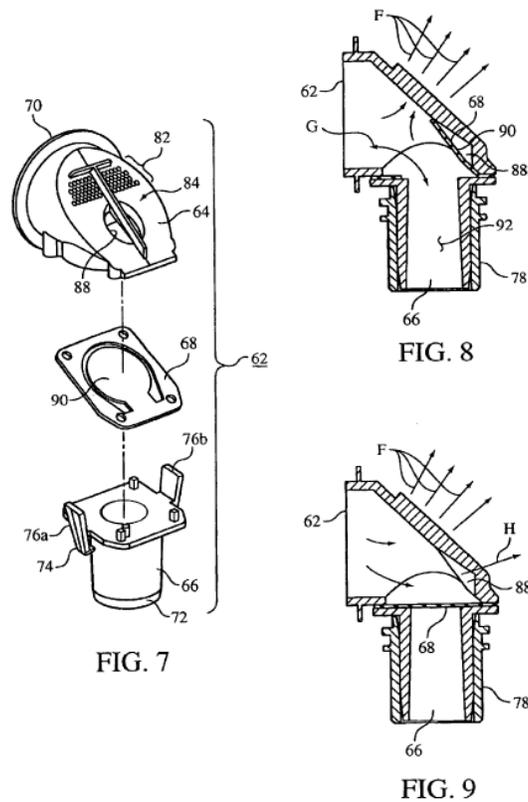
is an exploded view of exhaust port assembly 62. Figures 8 and 9 are cross-sectional views of the exhaust port assembly.
